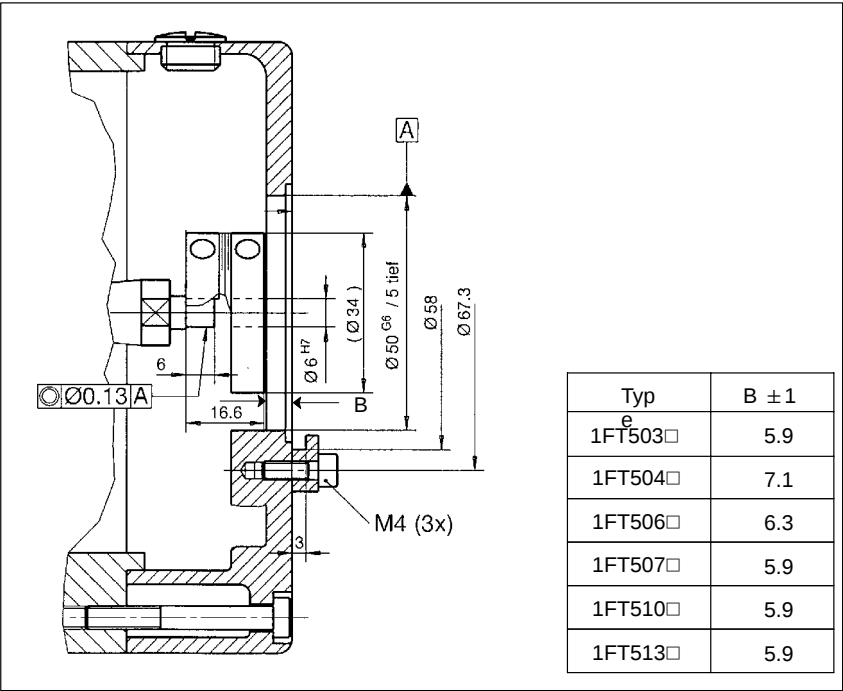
Mounting absolute angle encoders with standard pulse encoder flange onto
